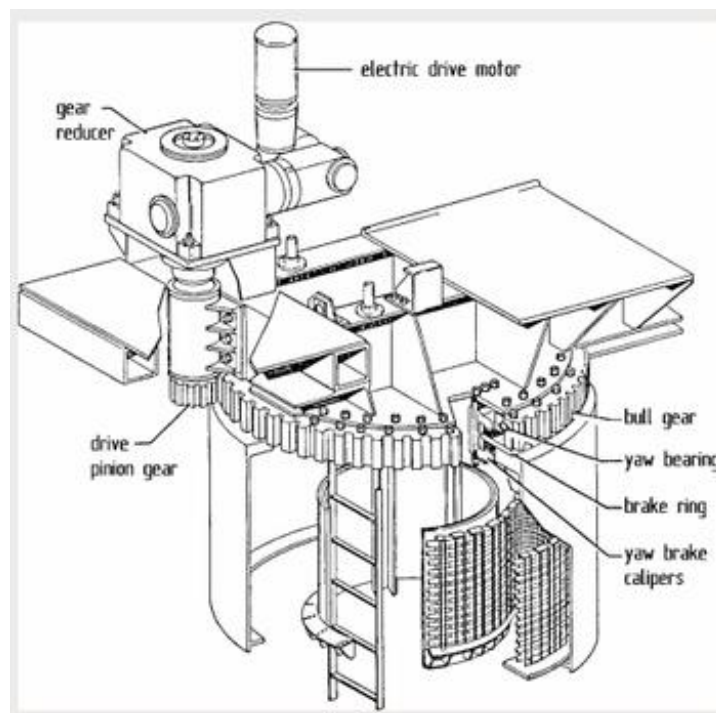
A cutaway of typical yaw drive with brake [20].
